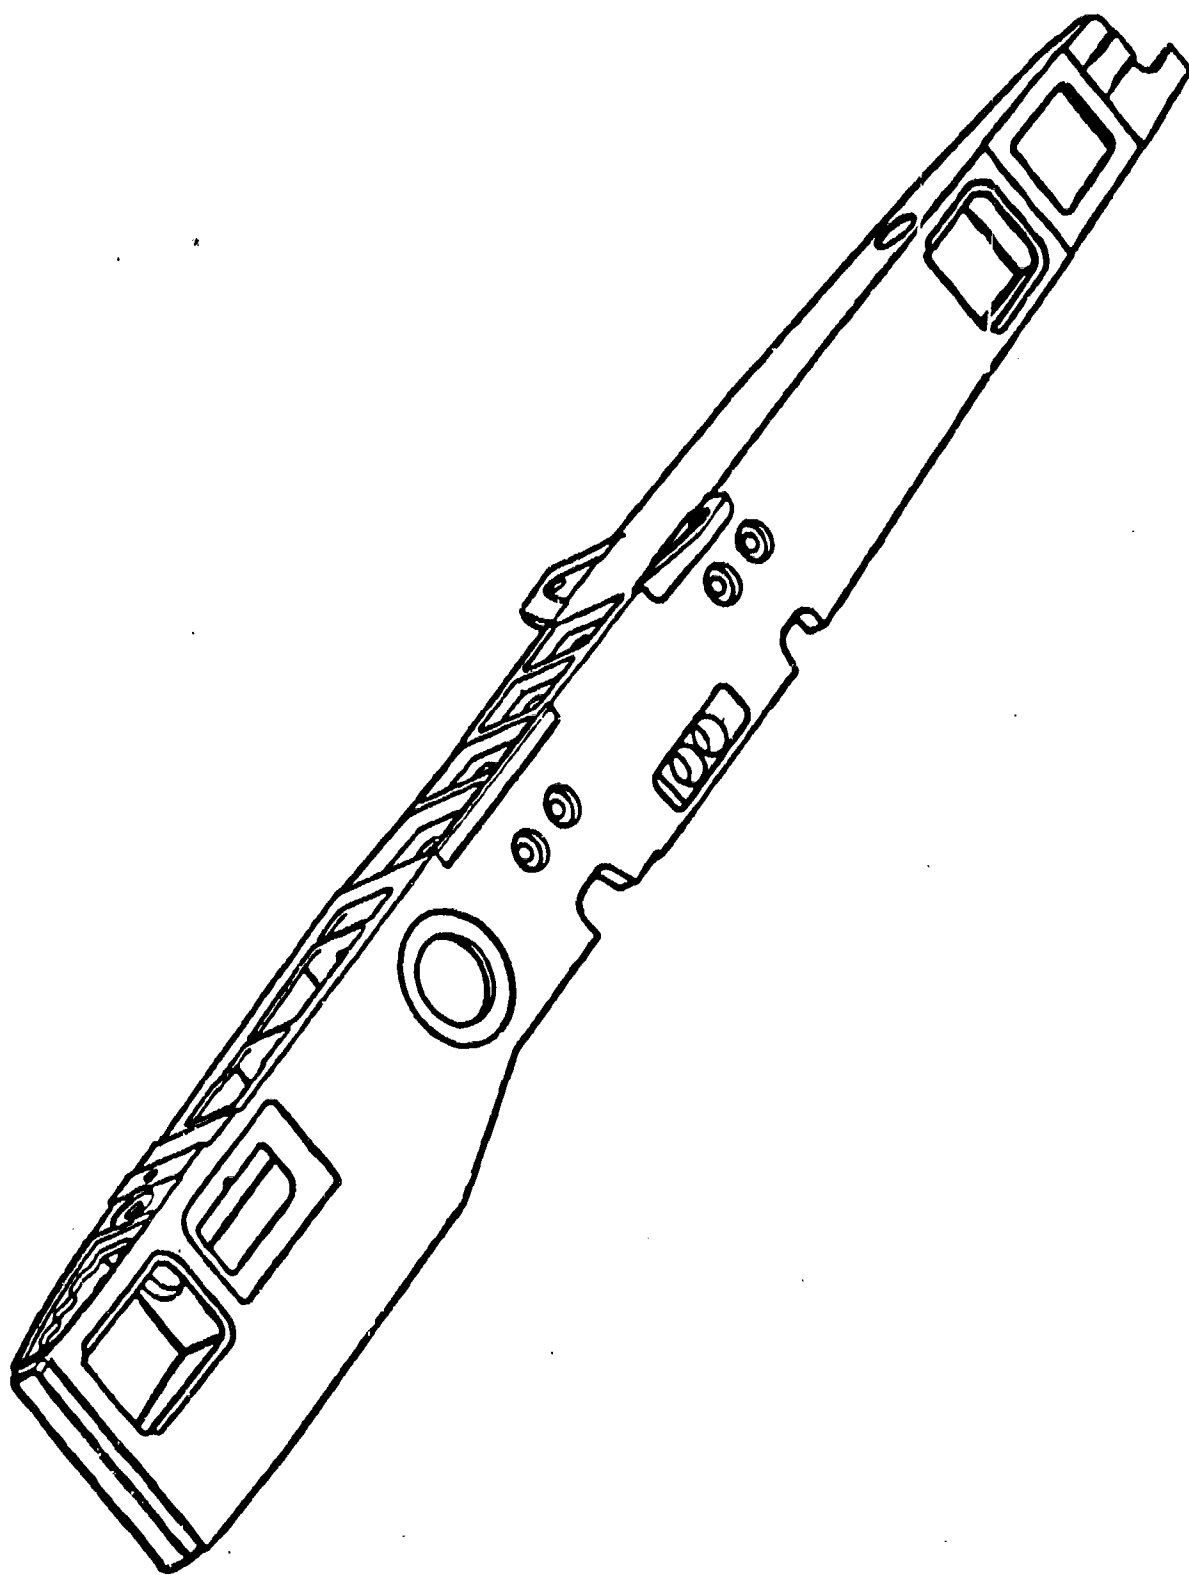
PYLON ASSEMBLY, MACHINE HOGOUT DESIGN, 7075 HAND FORGING
